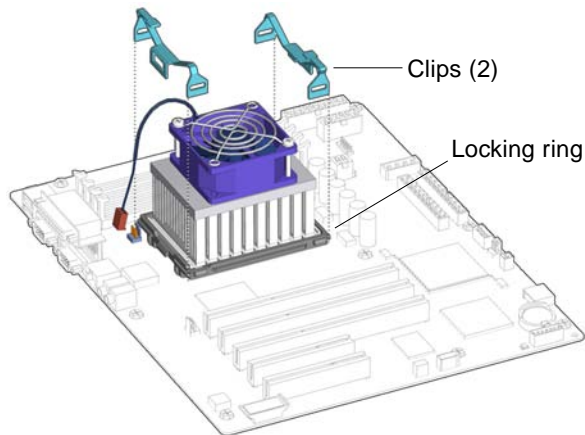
Releasing the CPU Fan and Heatsink Assembly Clips
